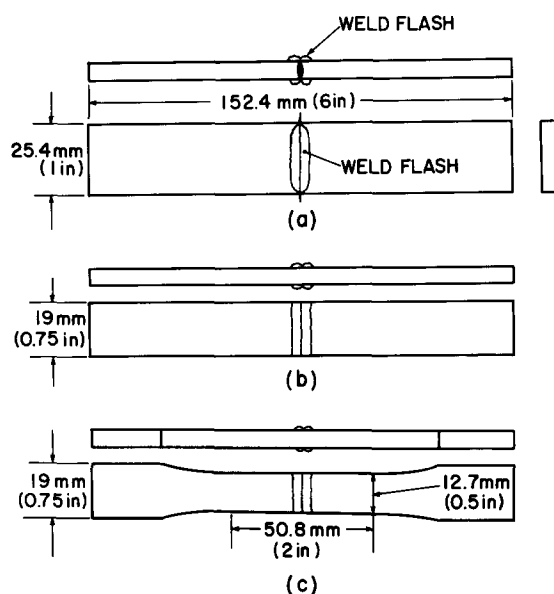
Specimens for determining the weld strength of butt welds
